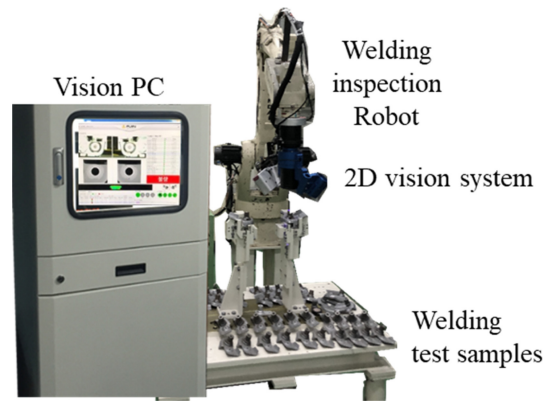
The vision system for CO<sub>2</sub> welding inspection system.
